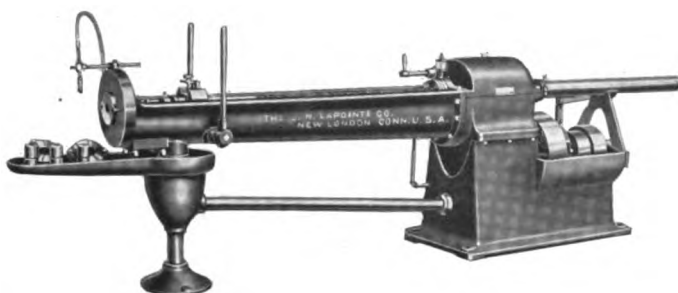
J. N. Lapointe Company No. 3B Broaching Machine
